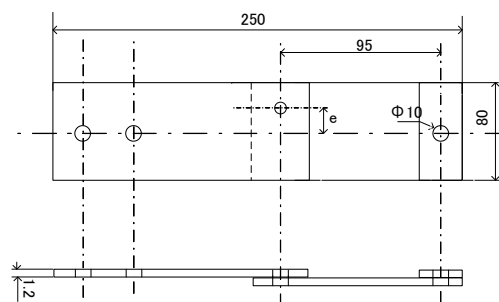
Schematic diagram of the tensile shear specimen spot-welded at the eccentric location.
